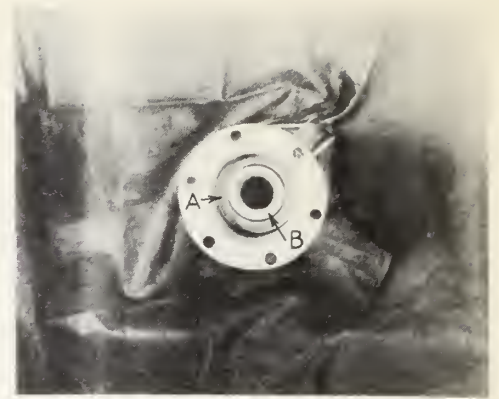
Model-A Ford drive-shaft grease retainer. A, The $\frac{1}{2}$ -inch plate welded in place. B, National grease retainer no. 50045.
